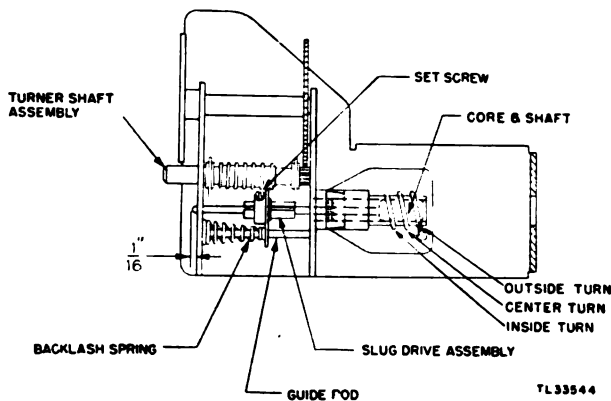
Radio Receiver and Transmitter BC-1267-A, r-f tuner assembly.
